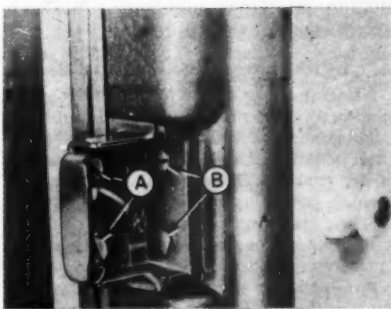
Screws "A" control in and out adjustment. Screws "B" control sideways adjustment.
